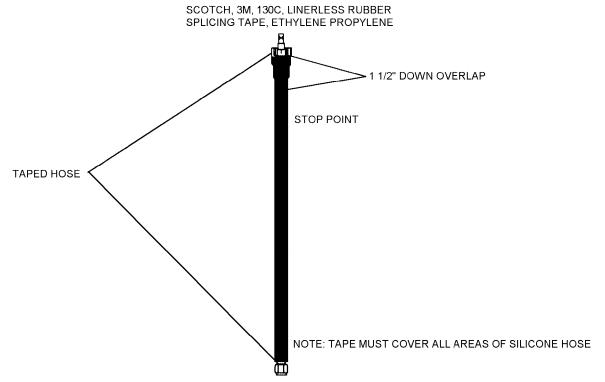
Seat Kit to Aircraft Console Hose Assembly Taping
